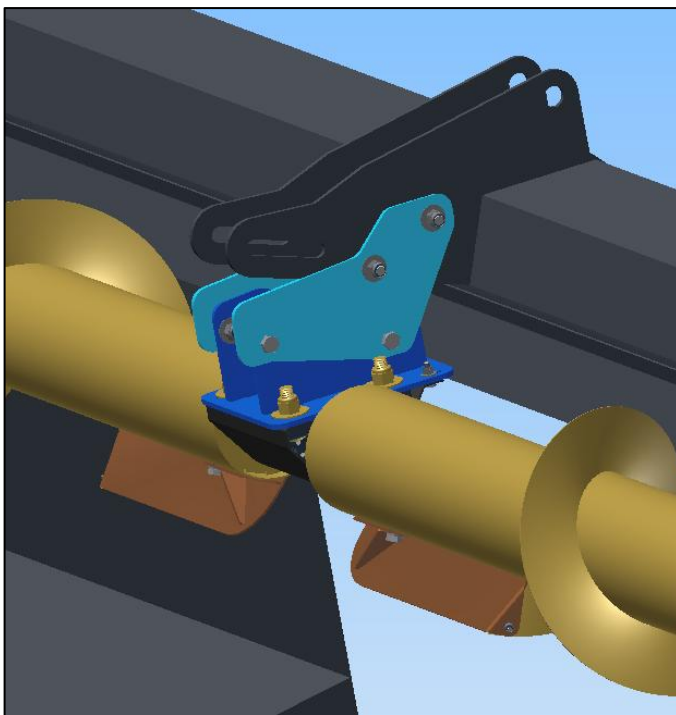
CENTER MOUNT - DRILL 4 HOLES IN THE REEL CYLINDER MOUNT PLATES HEADER
